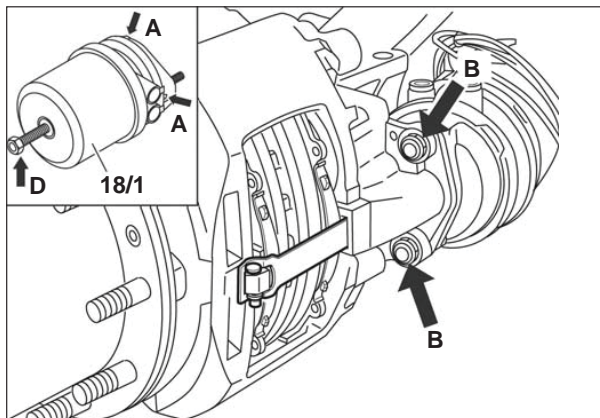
ACTUATOR SPRING CAGING AND REMOVAL
